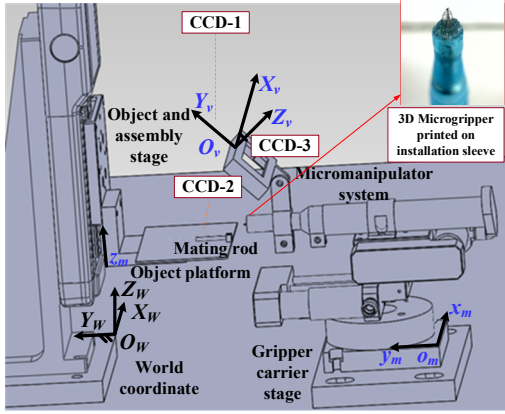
SolidWorks drawing of microassembly system with coordinate system of CCD-3.
